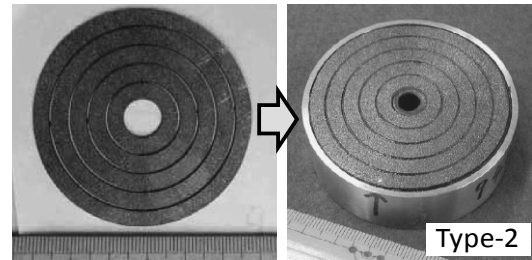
Fabrication of a multi-ring QMG magnet (Type-2)
